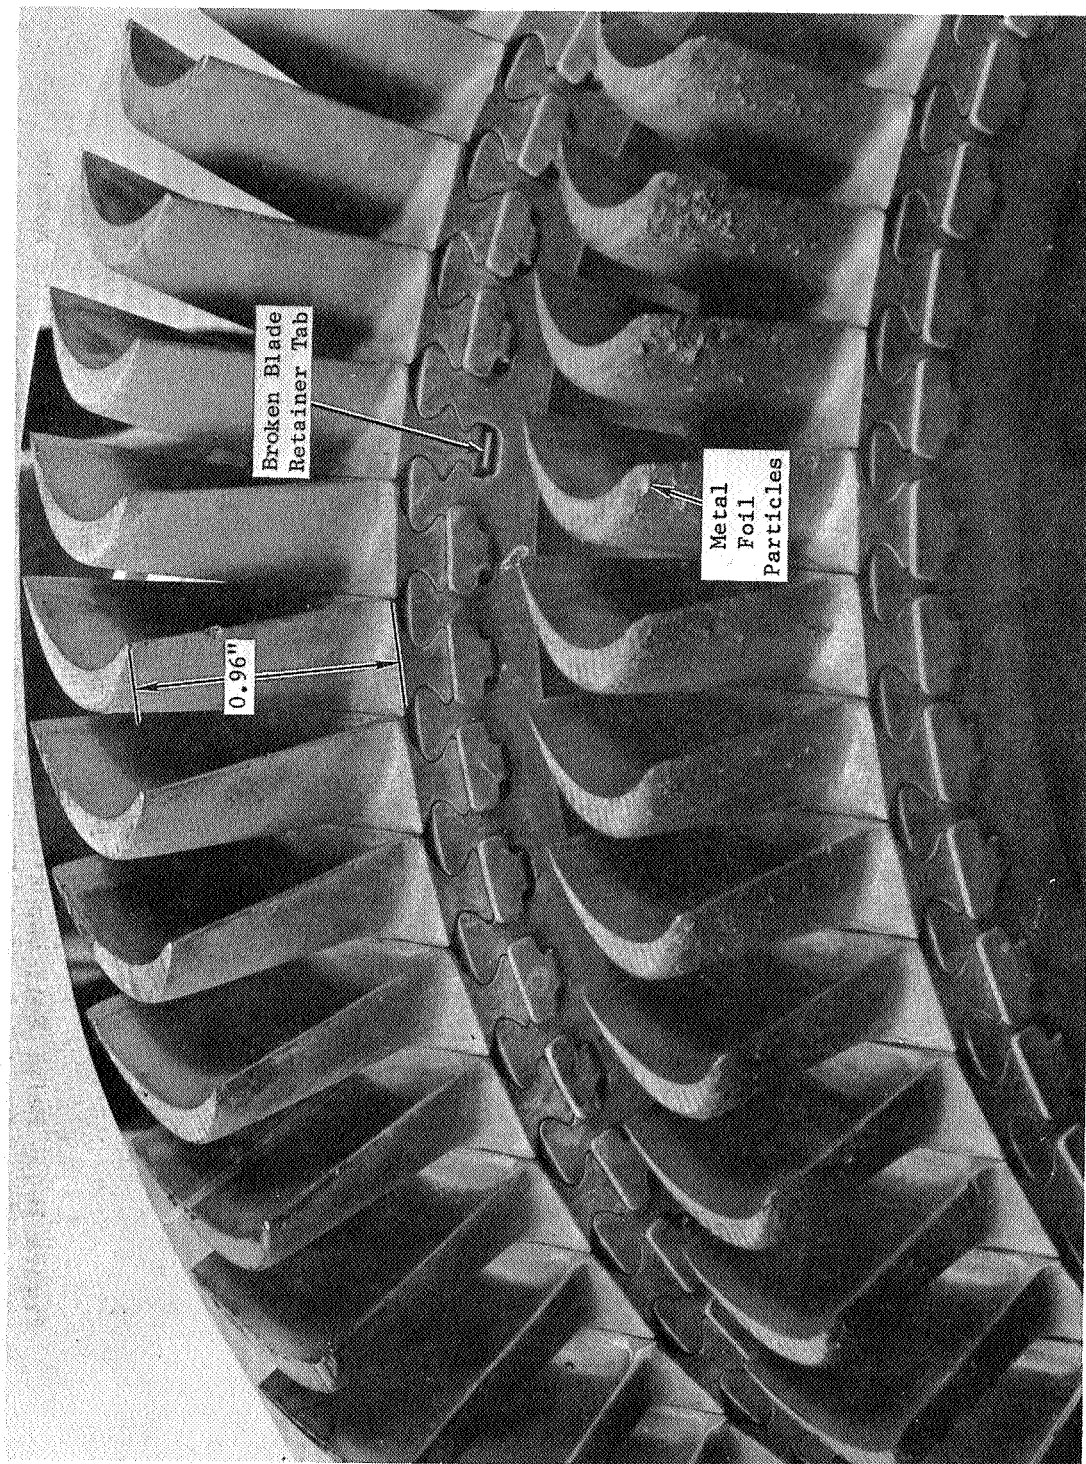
Close-up of Rotor Blades Showing Metal Foil Particles Impacted on First and Second Stage Blades. (C65060726)
